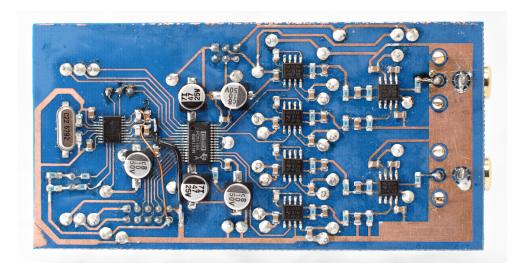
Prototype PCB with clock generator, DAC and reconstruction filter.
